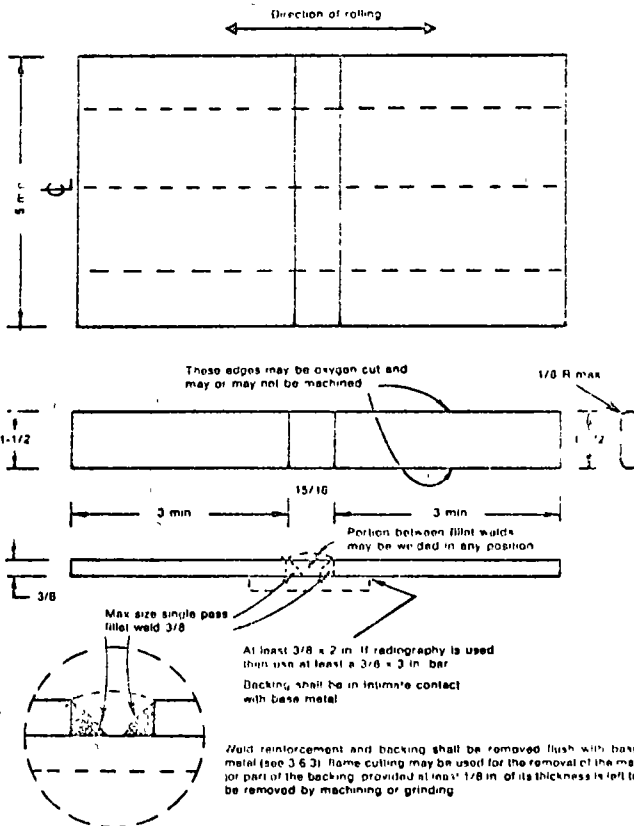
Fillet-weld root-bend test plate—welder qualification—option 2.
